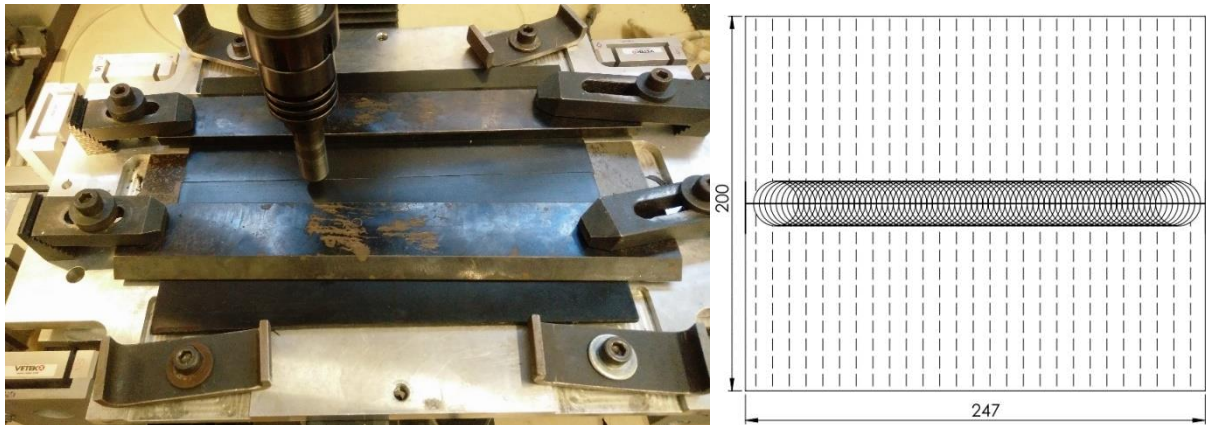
Setup used for welding plates in a butt joint configuration (left) and schematic of welded plates (right).
